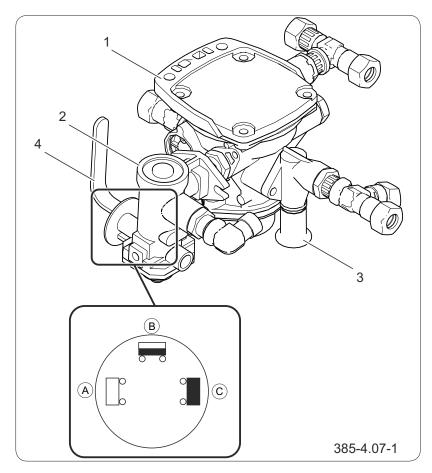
Control valve and braking force regulator (1) control valve (2) brake force regulator (3) release button (4) setting lever
